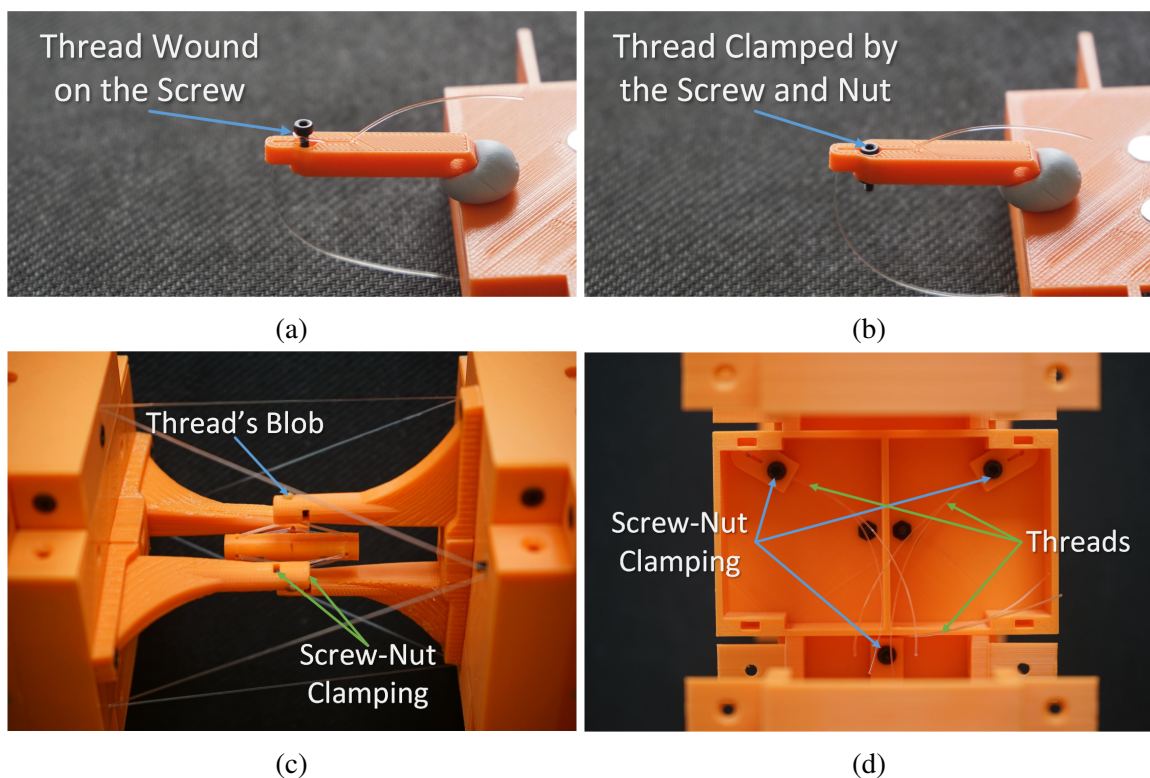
The fixation of threads to the structural parts or accessories. (a,b) The winding and fastening process of fixing threads to the levers. (c) The fixation of passive threads to the struts, with terminal end blob formed by heating. (d) The fixation of threads to the tiles without load cells.
